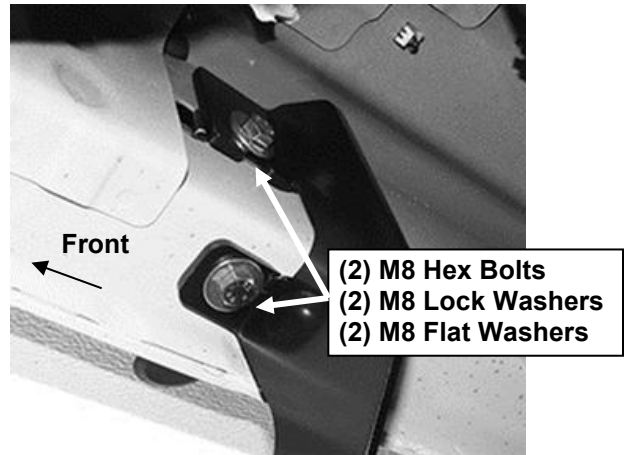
Passenger side mounting locations along bottom and back of body panel illustrated
